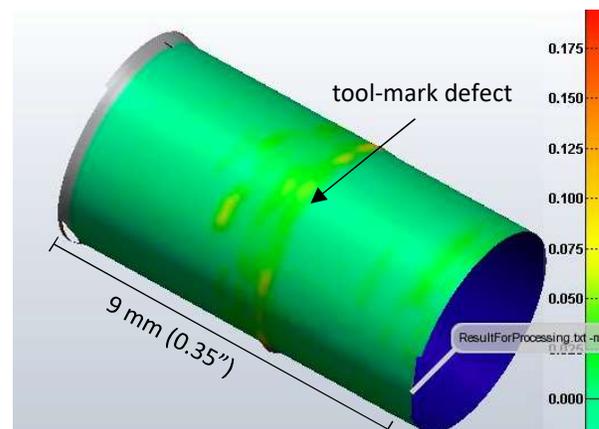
The inside (ID) surface of this rivet hole exhibits a tool-mark defect at the interface of composite and aluminum layers
